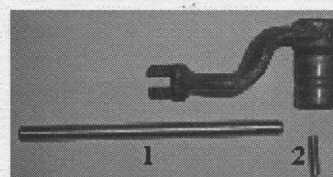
Figure G - old style cam assy. with #1 - push rod #2 - pressure pin
